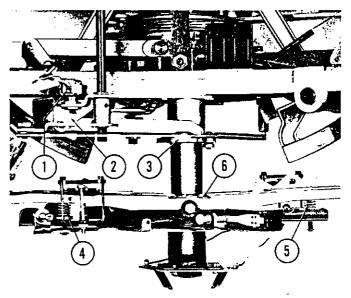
SELECTOR CRANKS, LOADING POSITION
